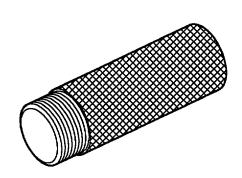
Setting Up to Machine I.D. of Bushing or Lug at Location 1, Y453.000 (Sheet 2)
